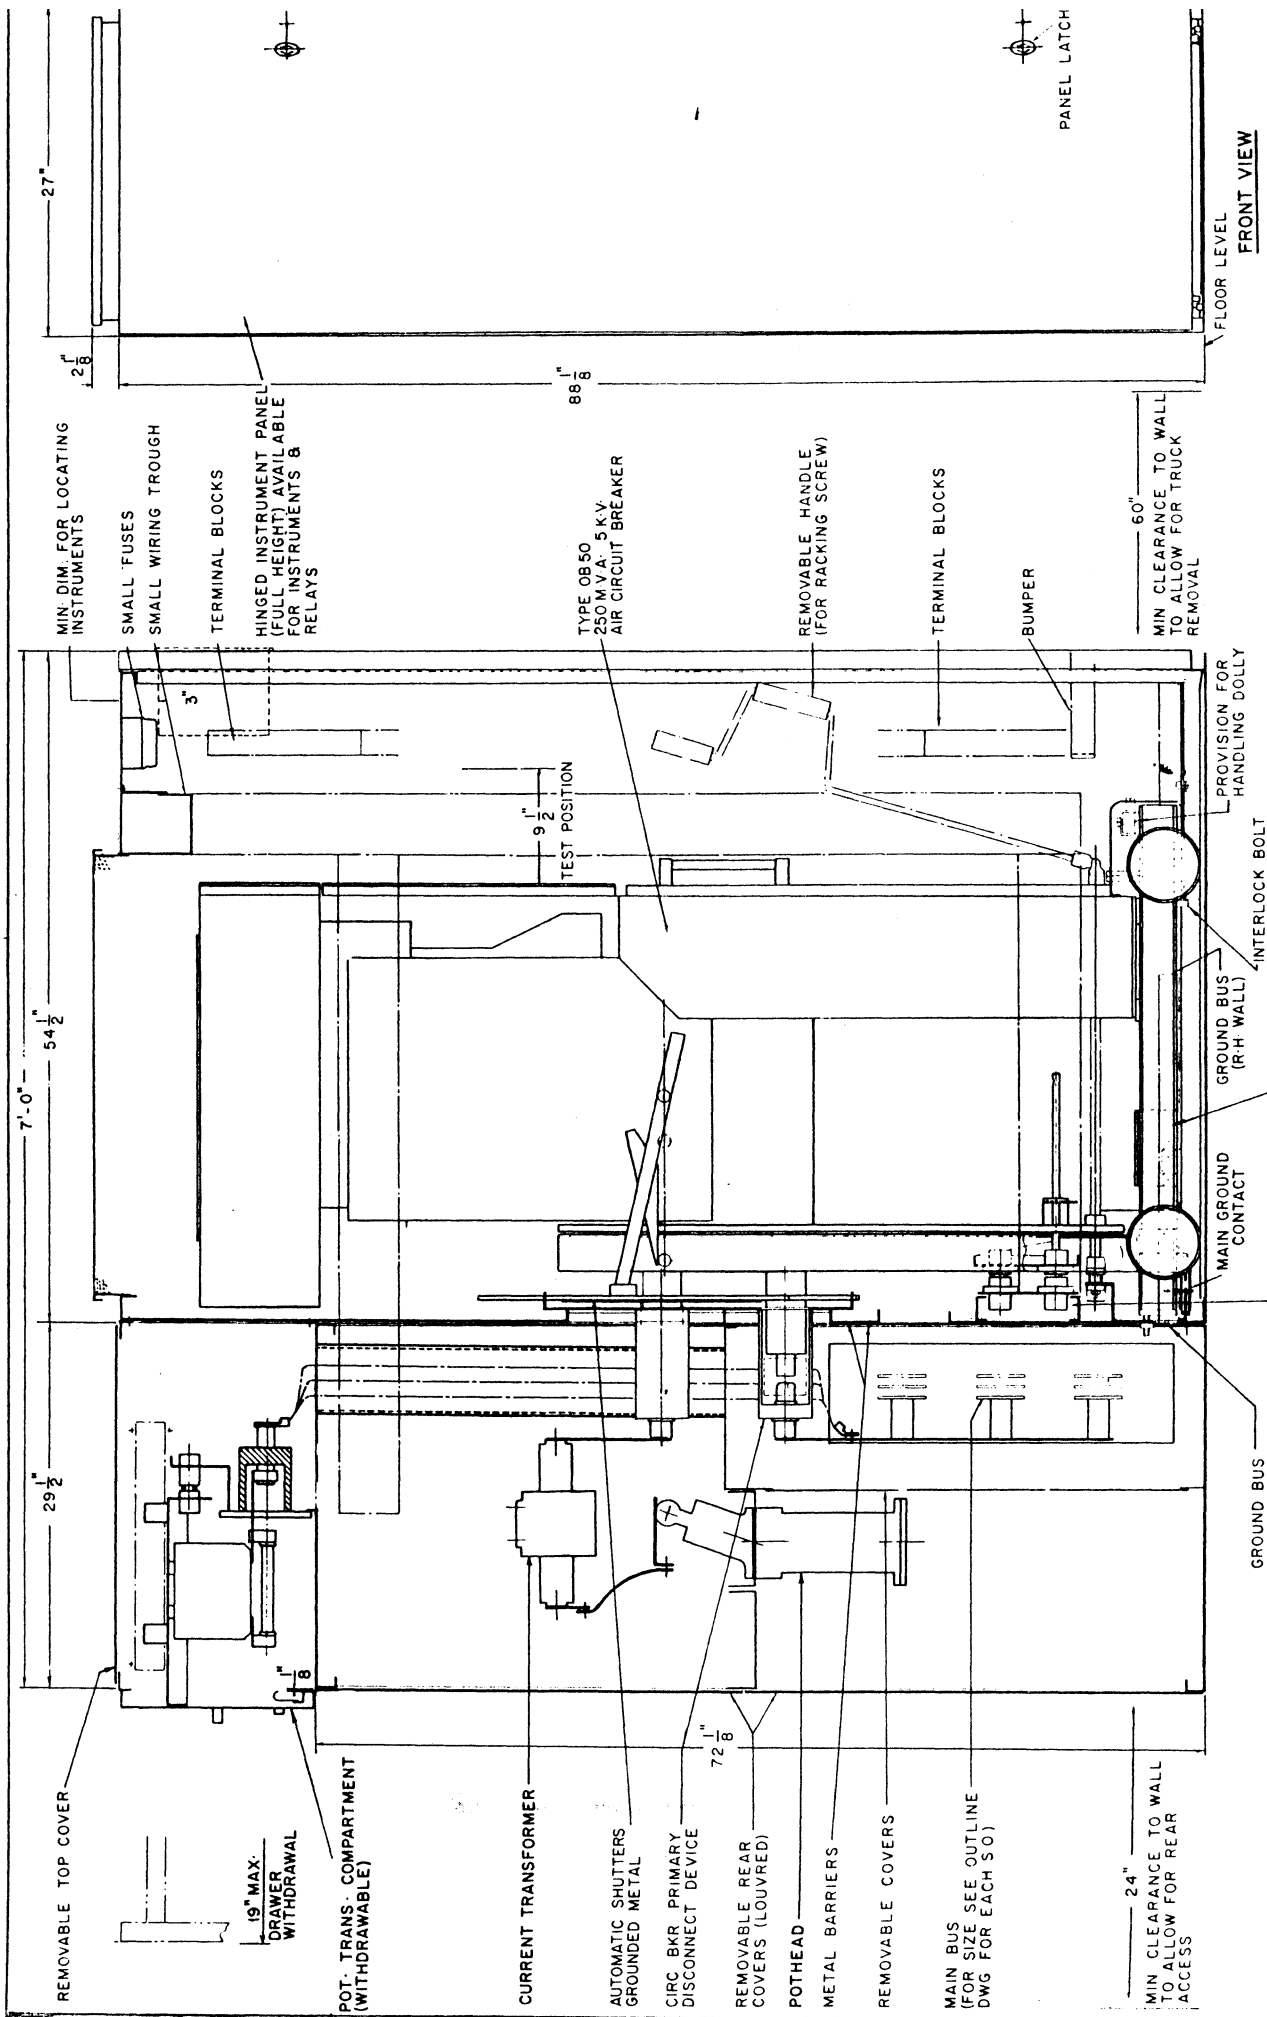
Cross-section of a mechanical switchgear assembly.
